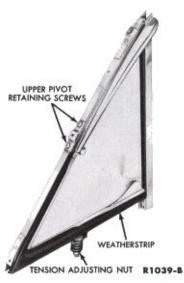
Vent Window Assembly Body Types Except 63, 76
